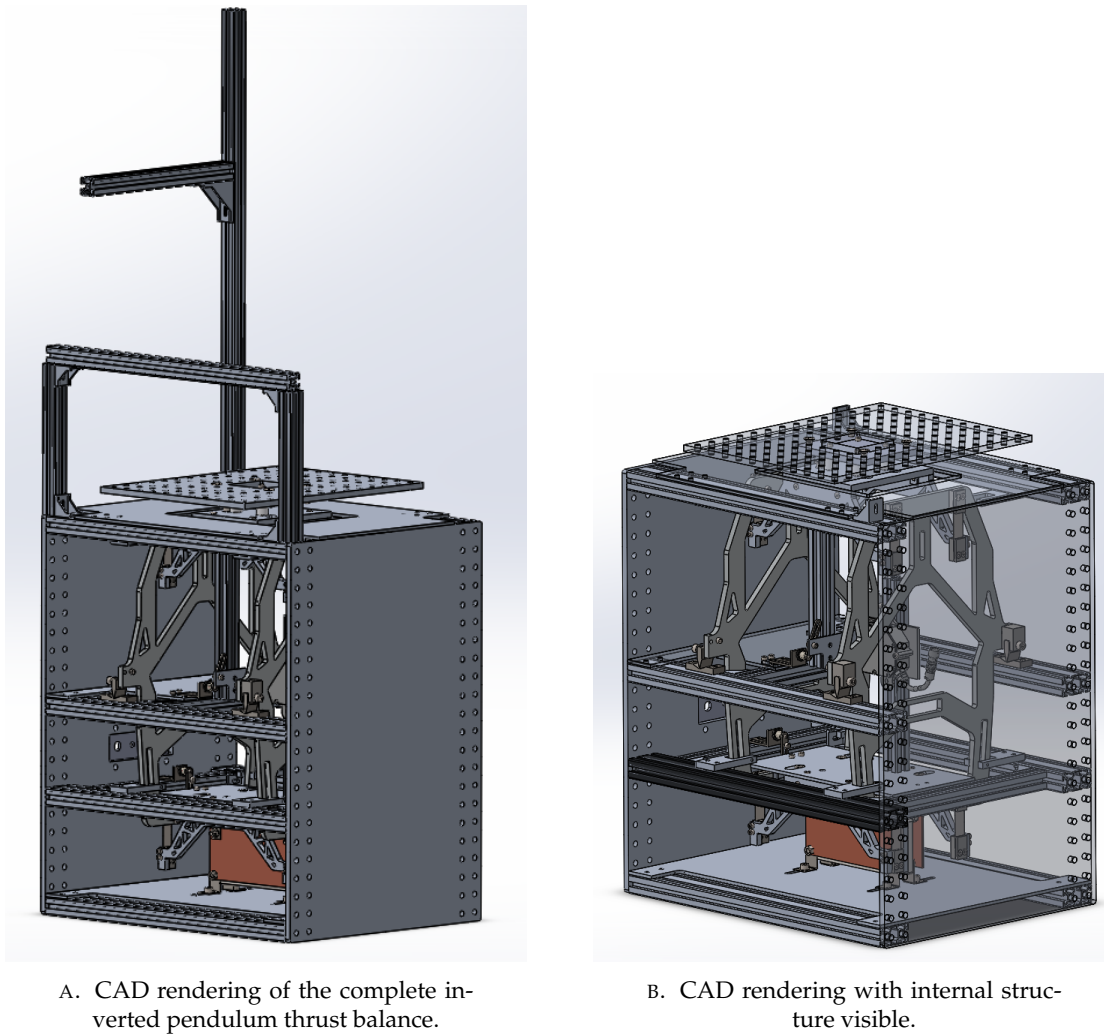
Design views of the inverted pendulum thrust balance.
